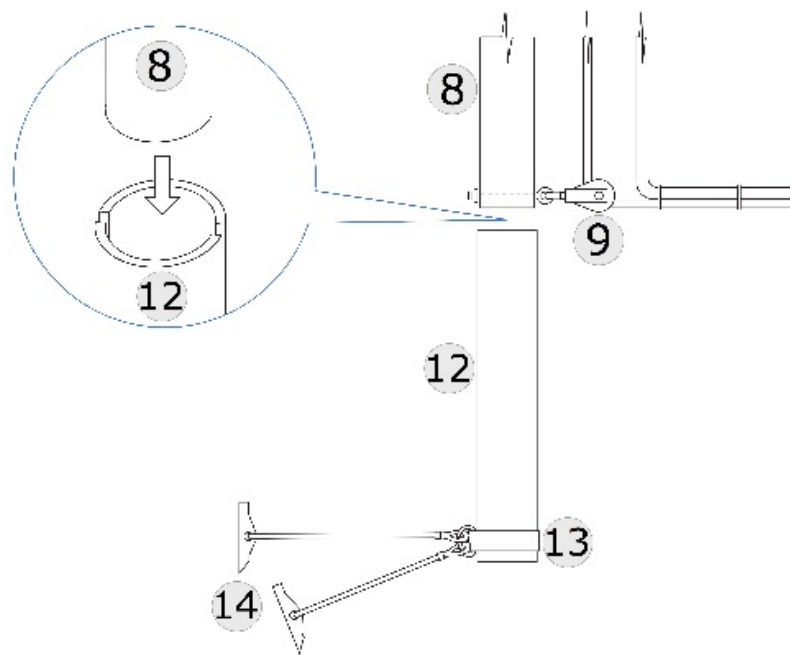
Diagram showing the lower (single) pulley assembly and the method of inserting the support poles into the mounting tubes (not to scale). Numbered circles designate parts described in the Antenna Construction section.
